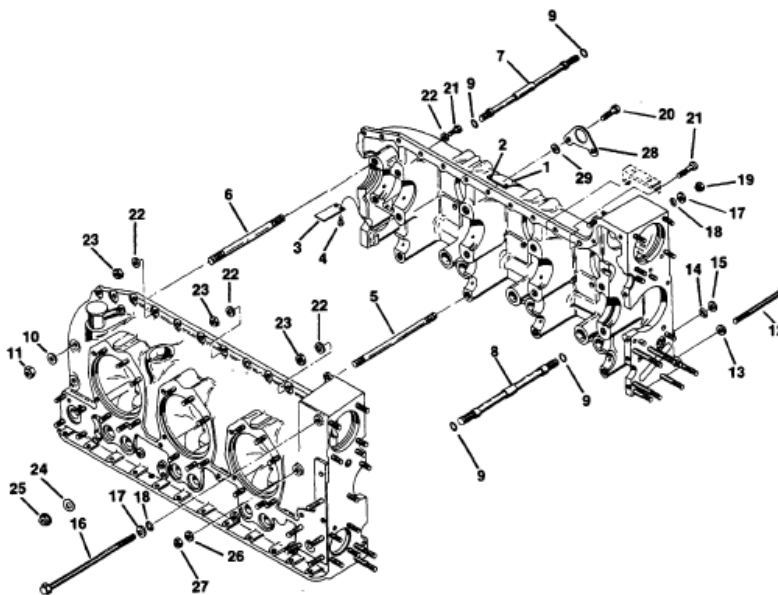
CRANKCASE ATTACHING PARTS
